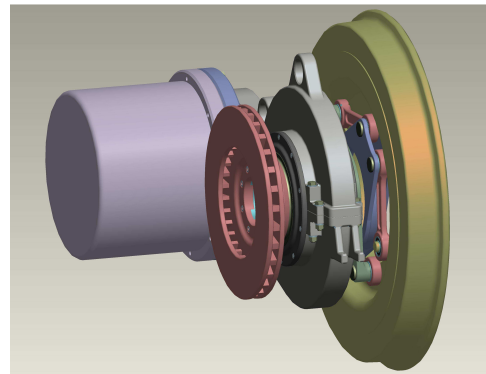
Concept of integrated driving unit - induction motor with gearbox with hollow output shaft.
